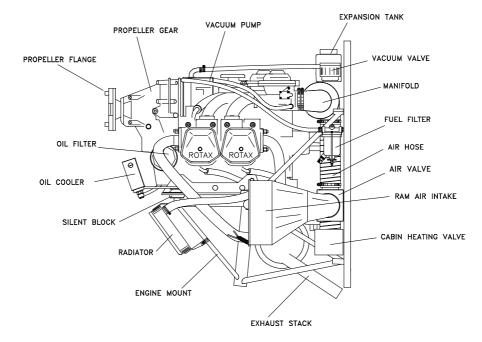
INSTALLED ENGINE WITH CARB HEAT SYSTEM
